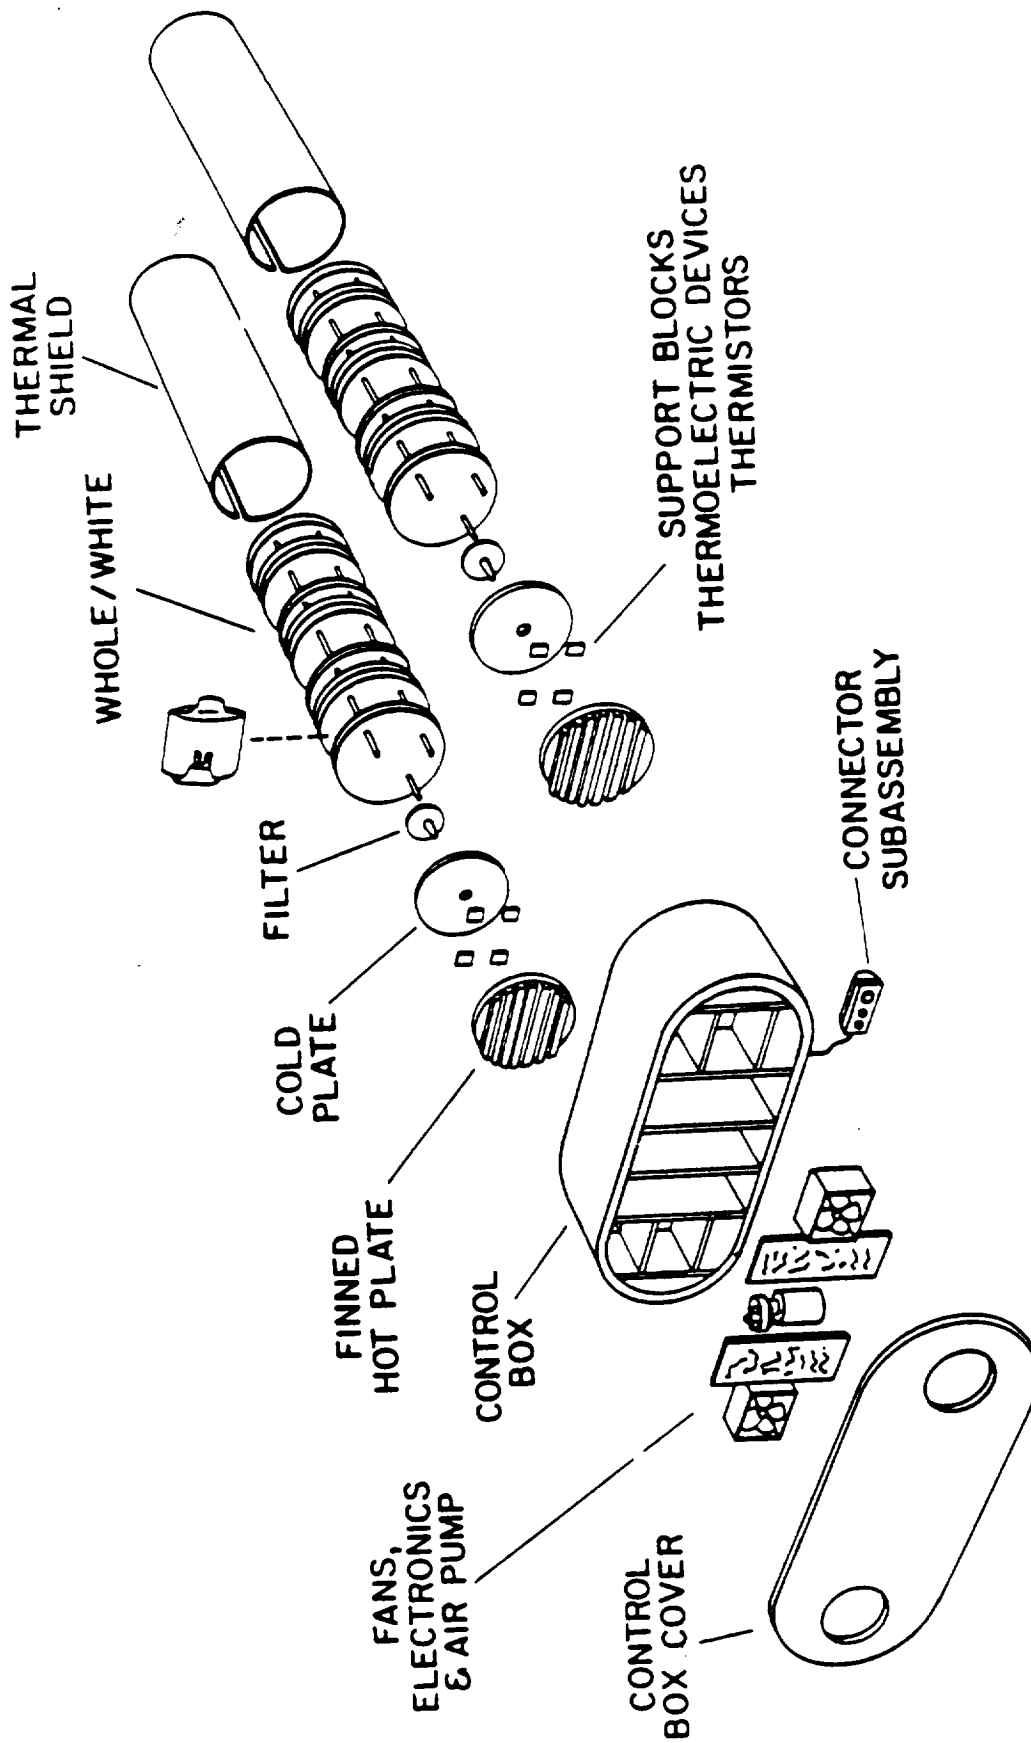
A DETAILED EXPLODED VIEW OF THE COLD/COLD MODULE
